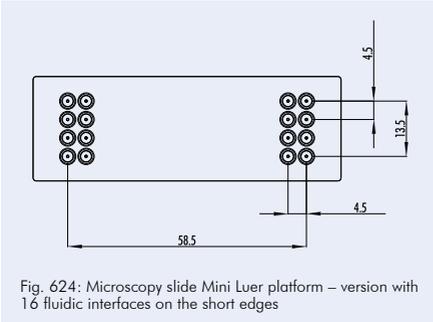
Microscopy slide Mini Luer platform – version with 16 fluidic interfaces on the short edges
